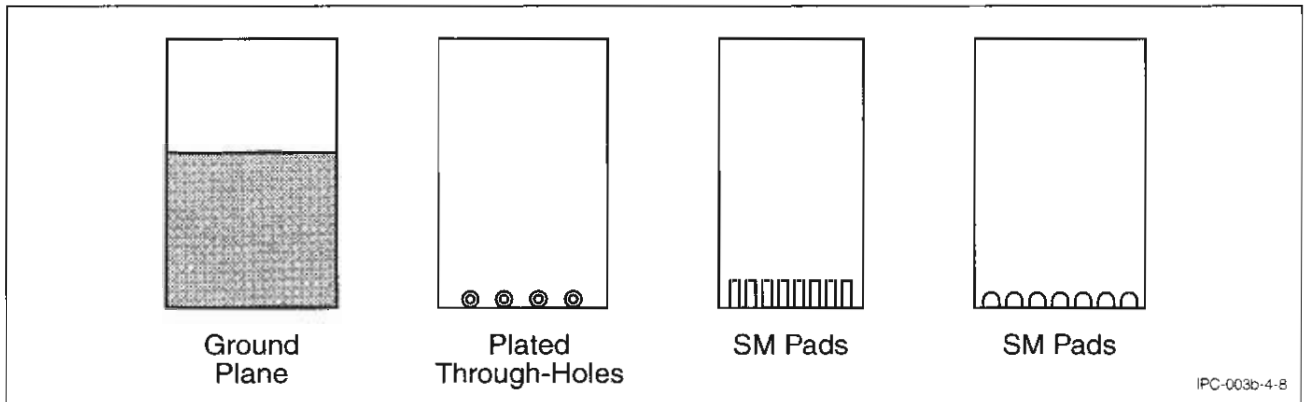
Suggested Wetting Balance Test Specimens and Soldering Immersion
